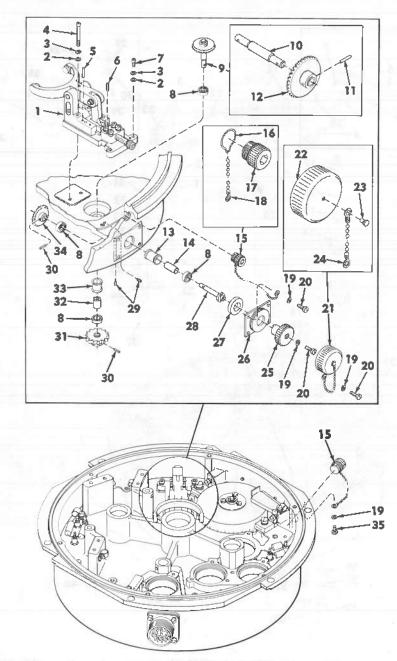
TRANSMITTER, POSITION, GUIDED MISSILE /9007946/-PARTIAL EXPLODED VIEW
